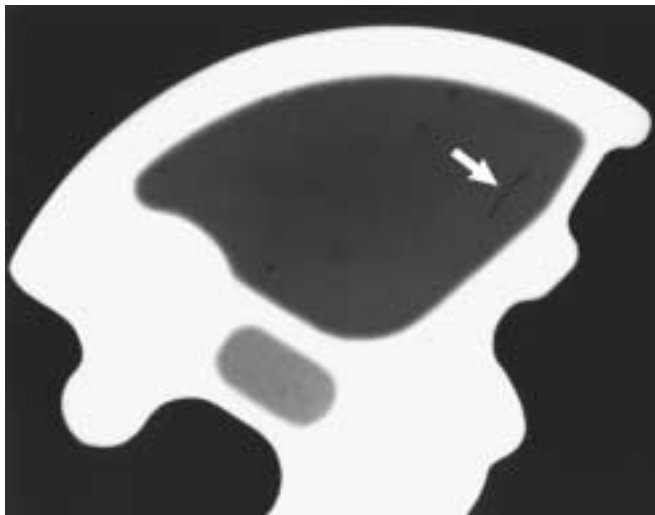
Cold shut in 3.2 mm (0.125 in.) aluminum casting.
